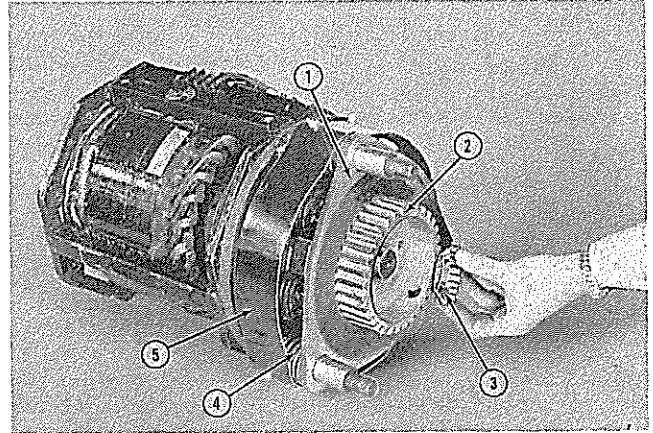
REMOVING BRAKE HUB LOCKNUT
